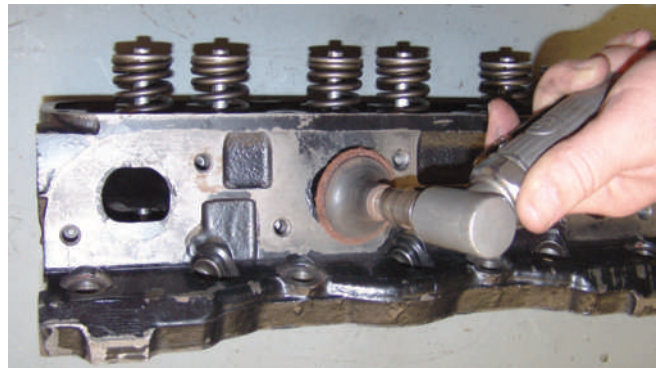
Using a power scraper pad will prevent any metal from being removed.
